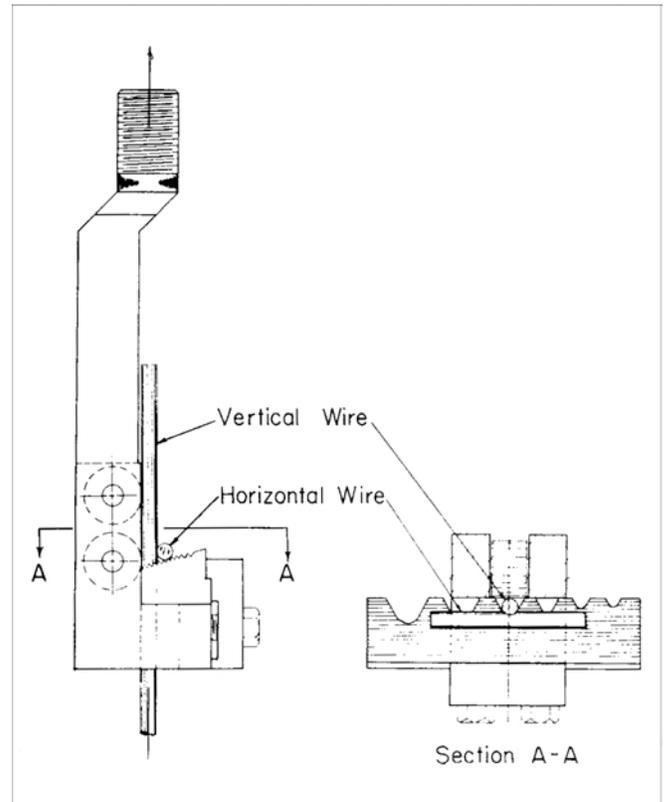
Weld Tester developed by W.E. Bradbury, It is still used to test welds for ASTM Specs.
